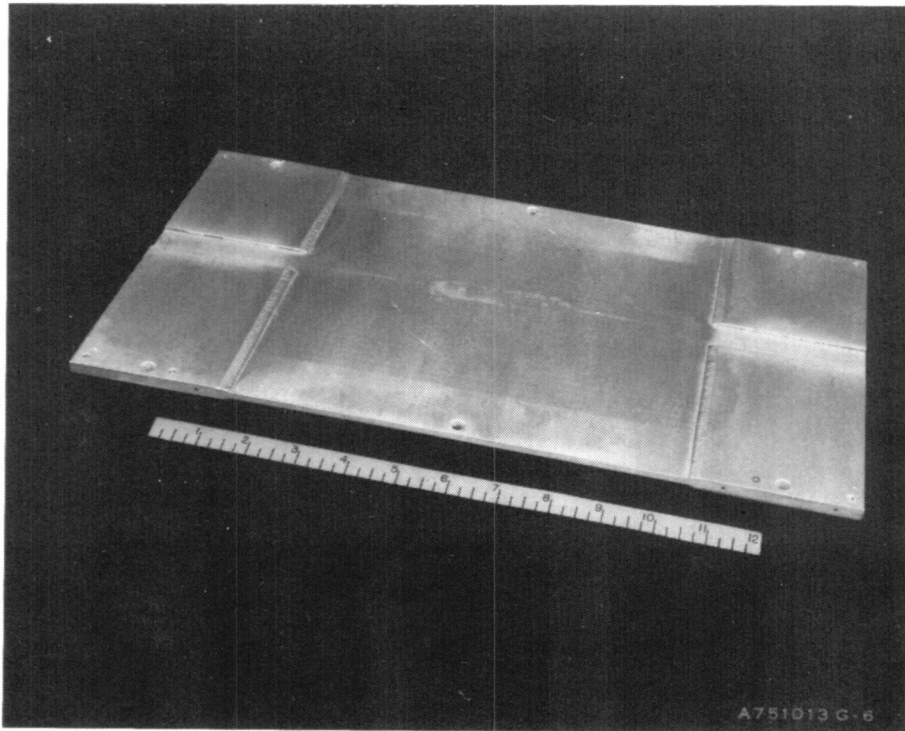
SIHS—Inboard Side of Fatigue Specimen after Brazing
